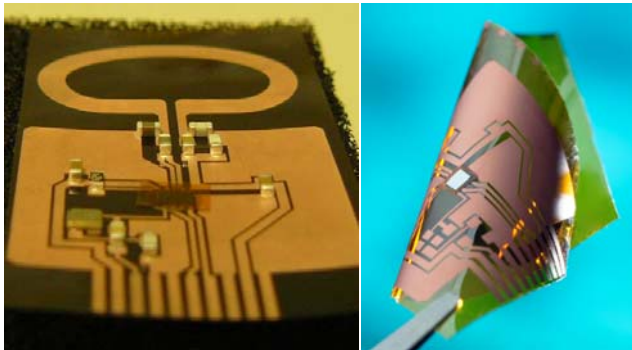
RF sub-module based on flexible films: the 25  $\mu\text{m}$  thin transmitter chip is placed below a cover film in the center of the module; the thick passives are standard SMD components. A replacement of resistors by printed technologies is close to reach with tolerances of roughly 6%.
